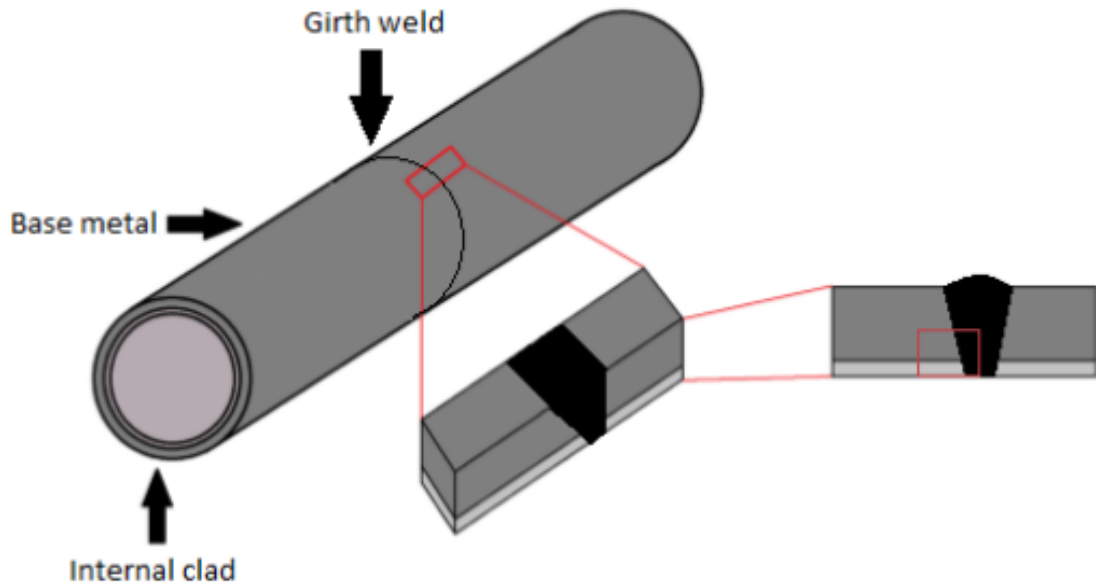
The A samples were extracted from a girth welded clad pipe [5].
